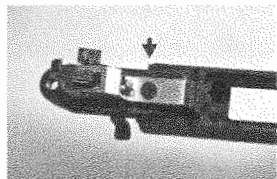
, Phillips head mounting screw of two position safety, trigger assembly.
